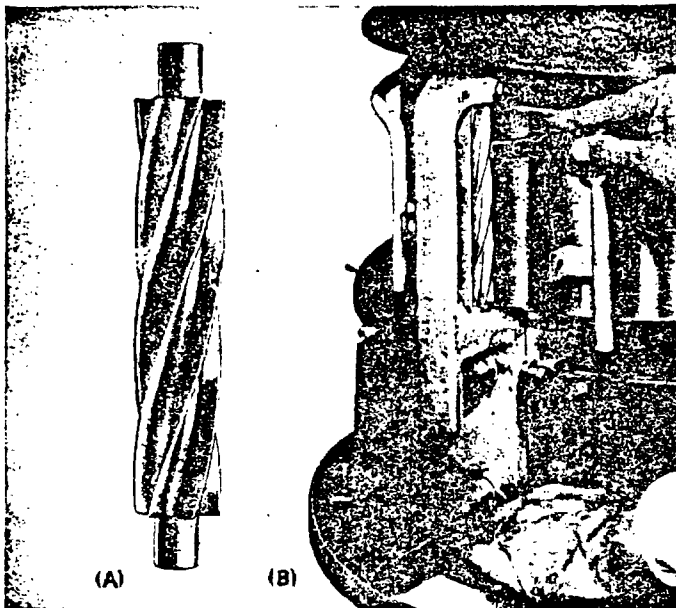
(A) Six spiral blades on center shaft of ice cutter were cast in one piece, replacing contemplated design using three machined and welded stainless steel parts. (B) Ice harvesting system in automatic ice maker showing ice cutter casting in position. Spiral cutter shaves ice into curved flakes, avoiding ice splinters.
